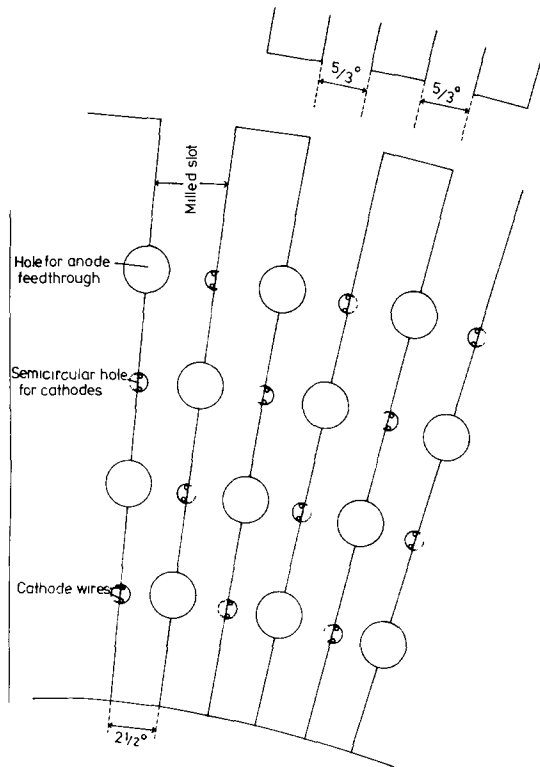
A part of the aluminium end flange showing the milled slots, the holes for the anode feedthroughs and the semicircular holes for the cathode wires.
